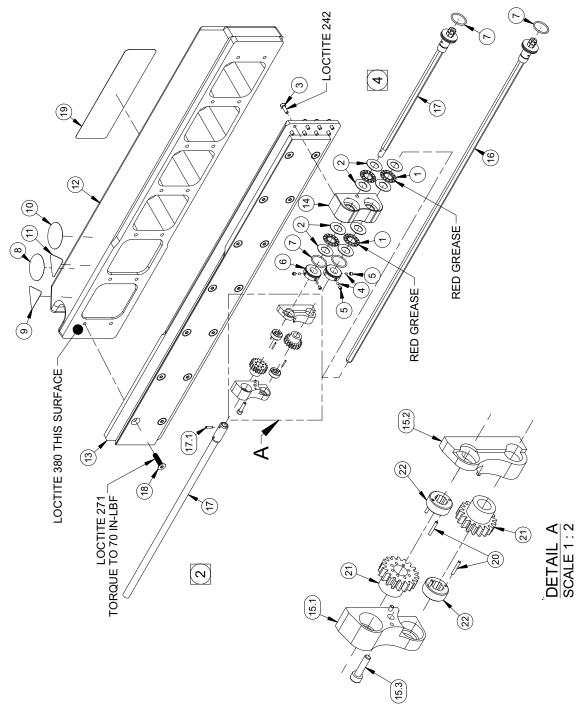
MACHINING ARM ASSEMBLY (P/N 90337 REVISION E)
